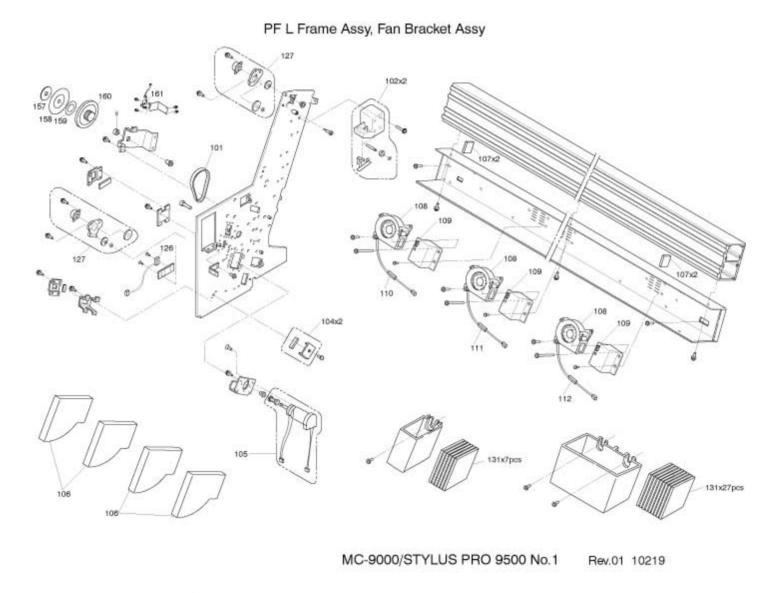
PF L Frame Assembly, Fan Bracket Assembly
